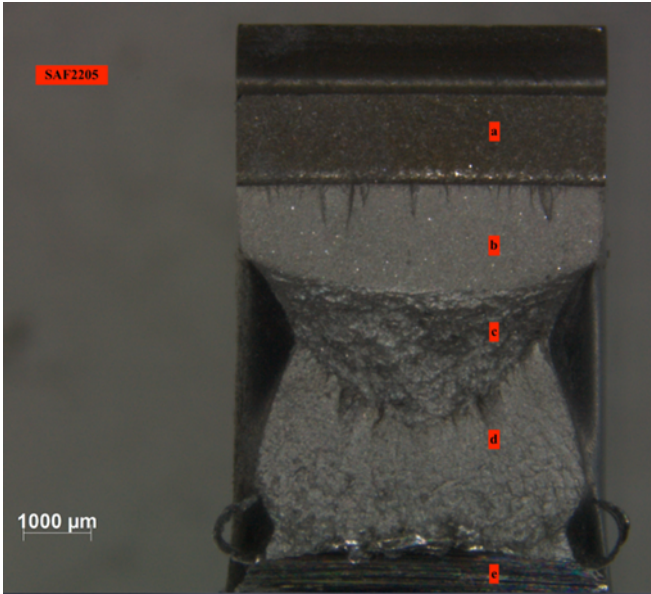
Fracture surface of the SAF2205 SE(B) specimen.
